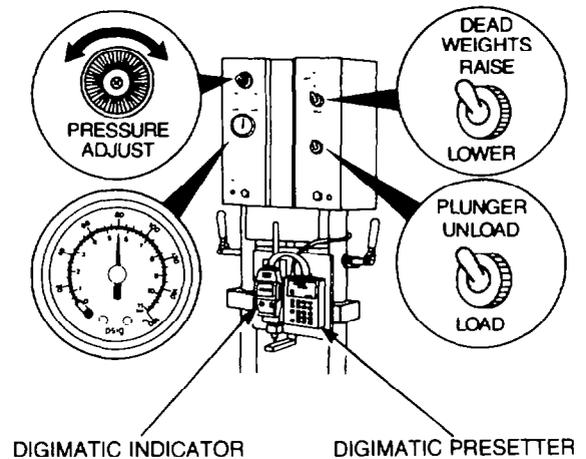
Top Stop Setting Fixture 3822696 — Controls
